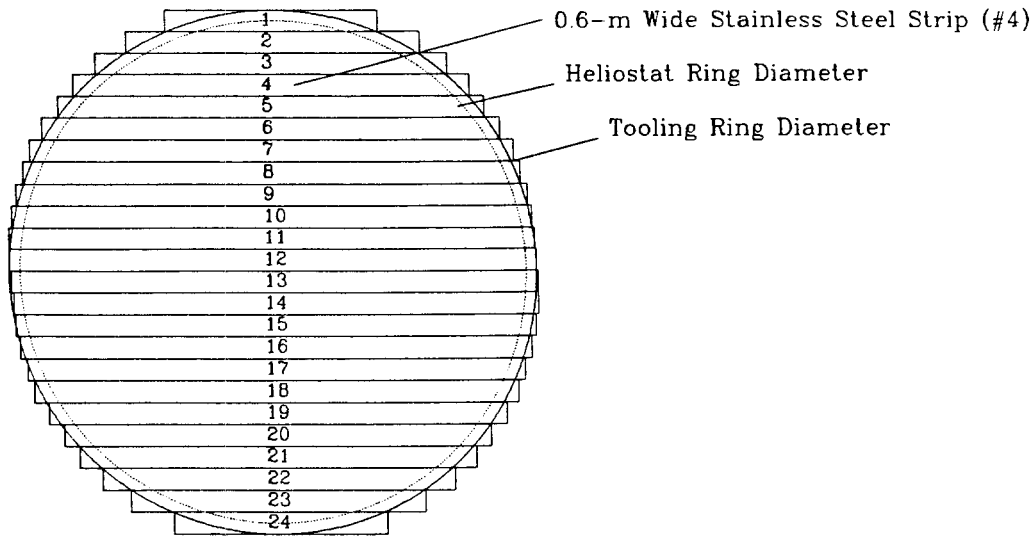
Heliostat Membrane Welding Pattern
